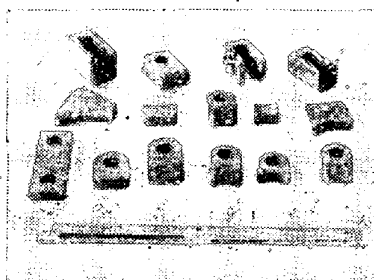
Spacers and supports for boiler tubes made by shell molding process.
